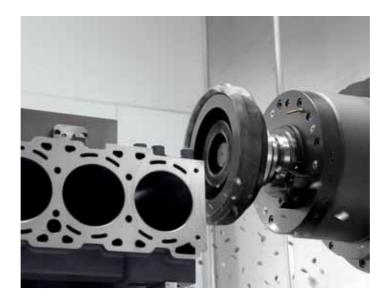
The spindle with the largest inner bearing diameter of 12 mm
